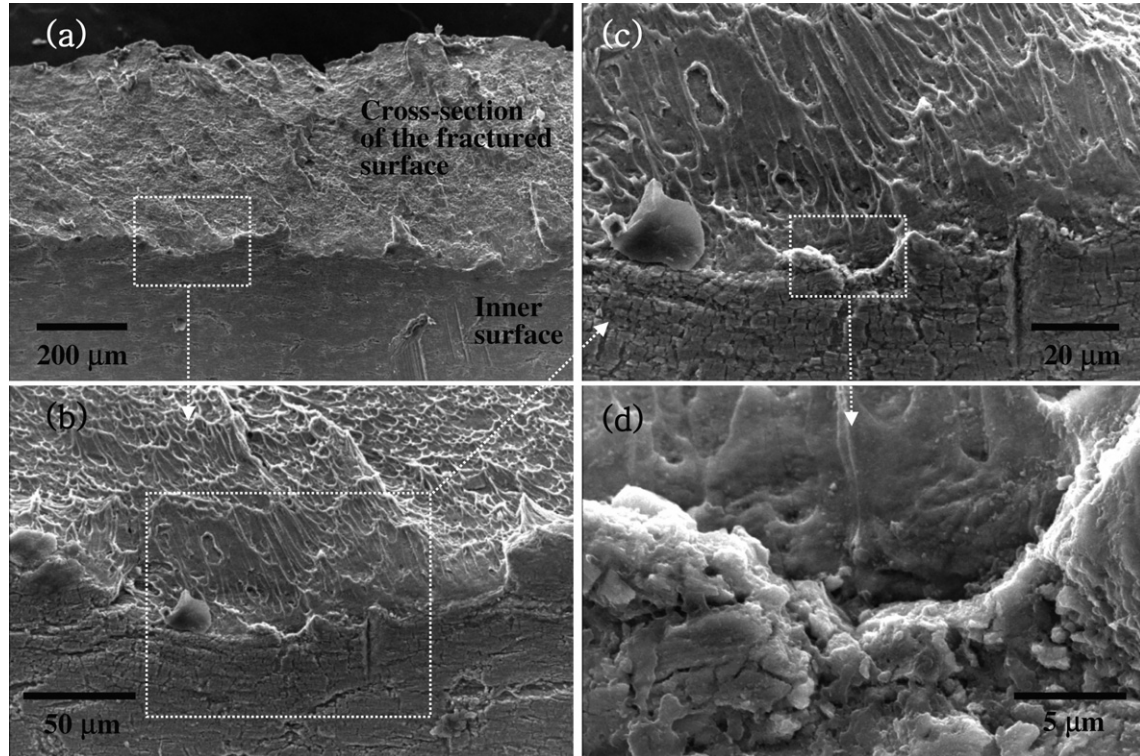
Cross-section of the fractured position at 400 MPa (Fig. 2(a)) showing lots of dimples due to ductile fracture.
